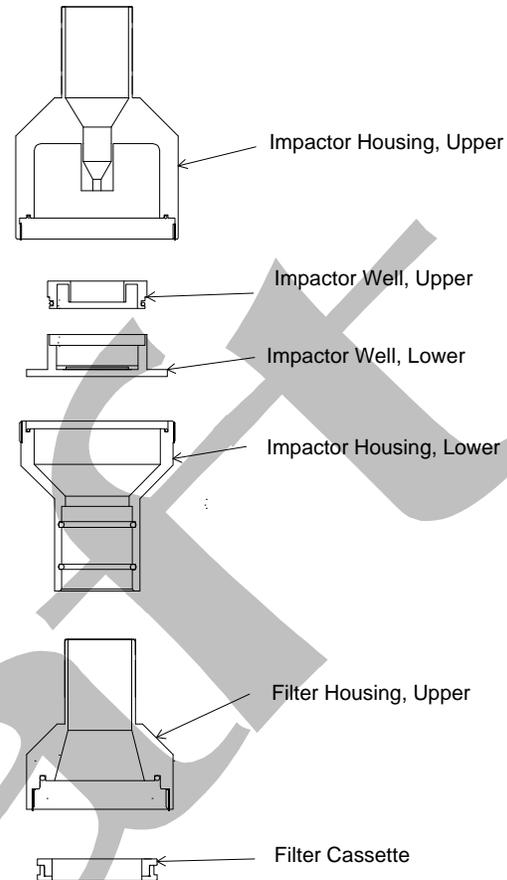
Exploded view of design of PM_{2.5} impactor well and filter holder.
